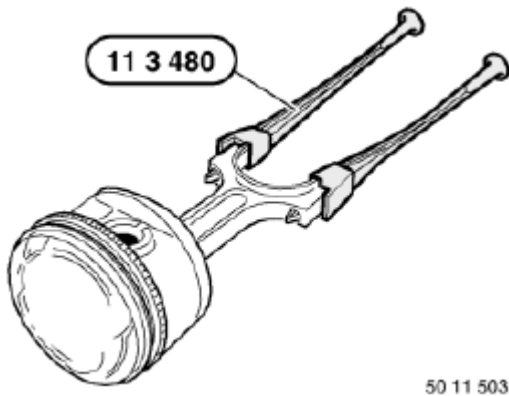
Locating Conrod Bearing Cover Bolts
